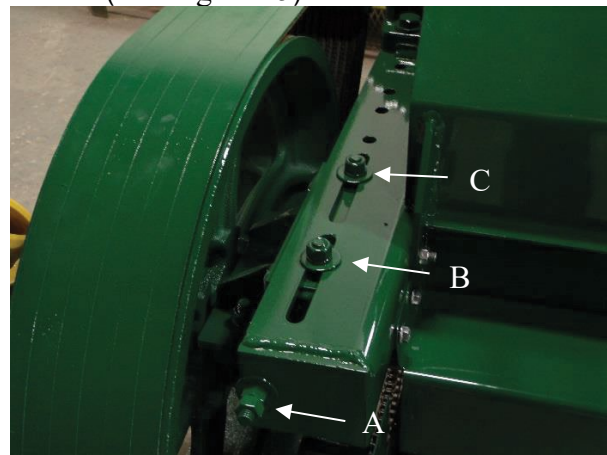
Belt Tension Adjustment (Shields Removed for Clarity).
